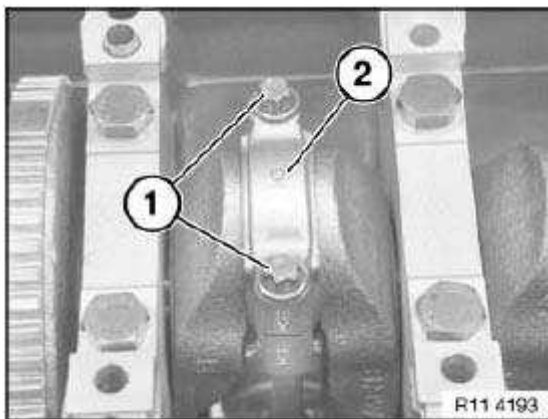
Conrod Bolts And Connecting Rod Bearing Cap
